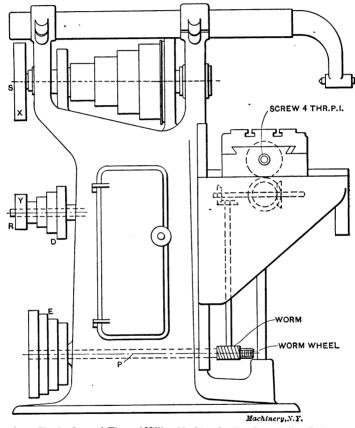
General View of Milling Machine, having Cone Pulley Feed.
